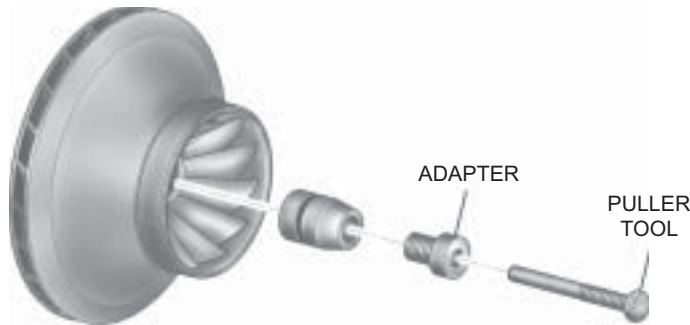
A –REMOVING THE IMPELLER (HA 41)
